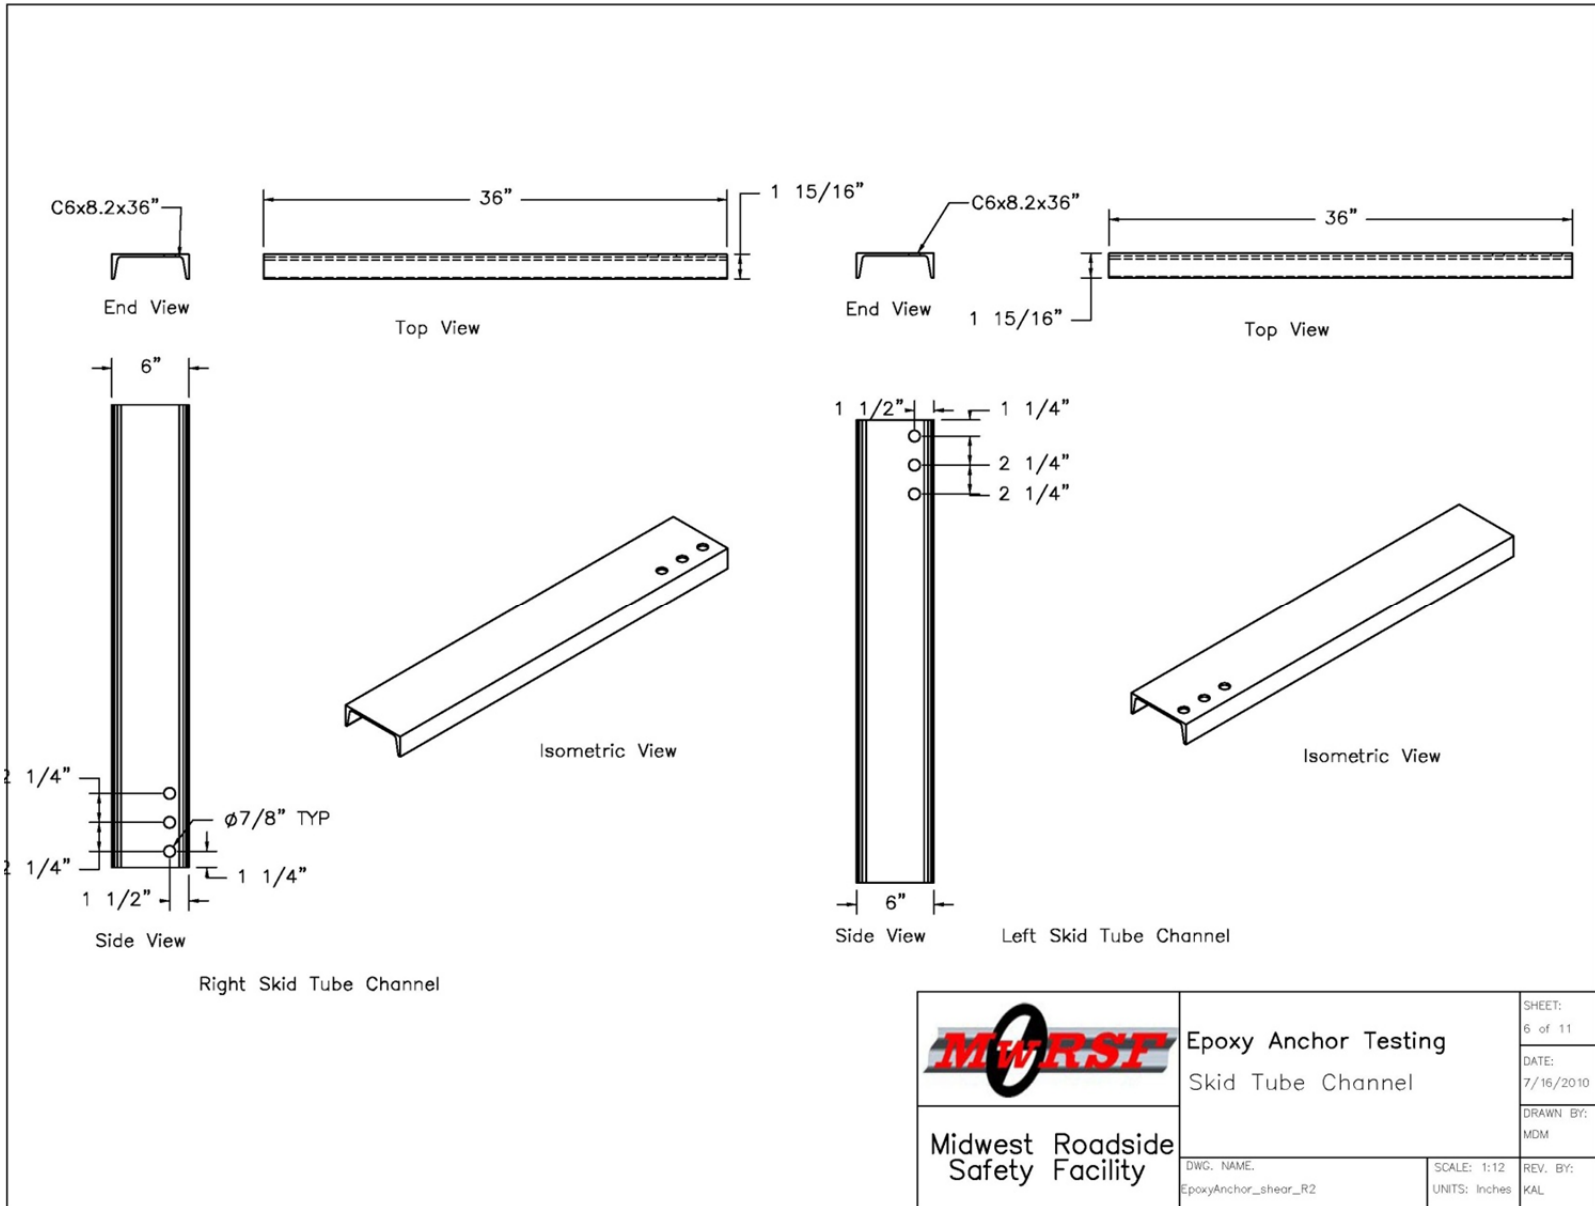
Shear Test Jig Skid Tube Channel Detail
